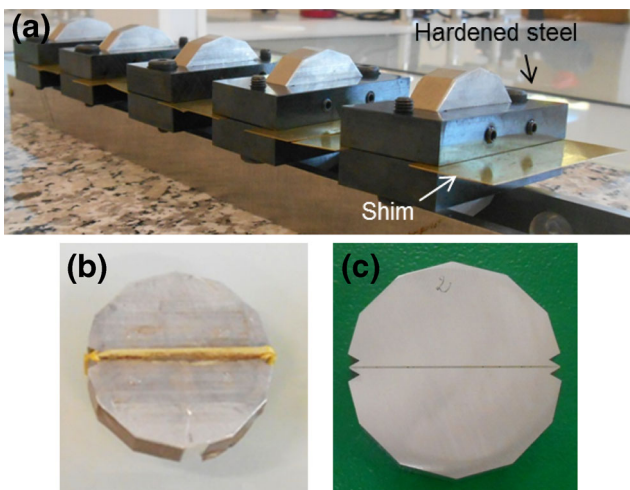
(a) Specimens before curing and bonding devices. (b) Specimen just after curing. (c) Final specimen ready for testing
